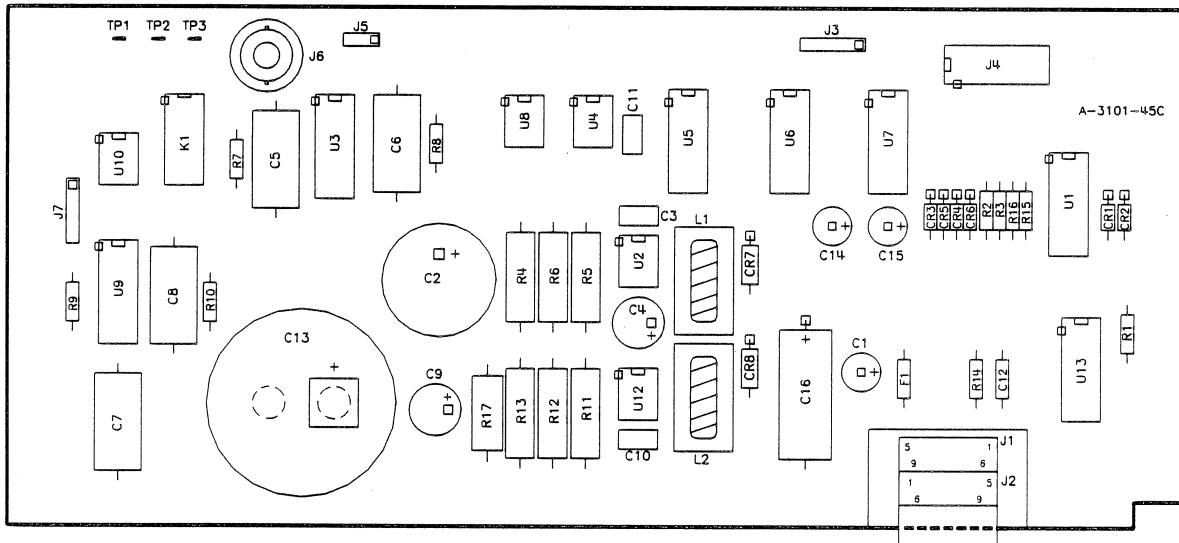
Power Supply/Control Board Assembly (1 of 2)
